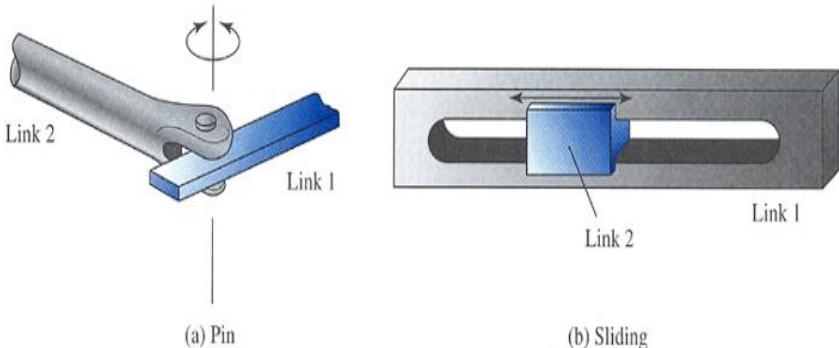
Primary joints: (a) Pin and (b) Sliding.
